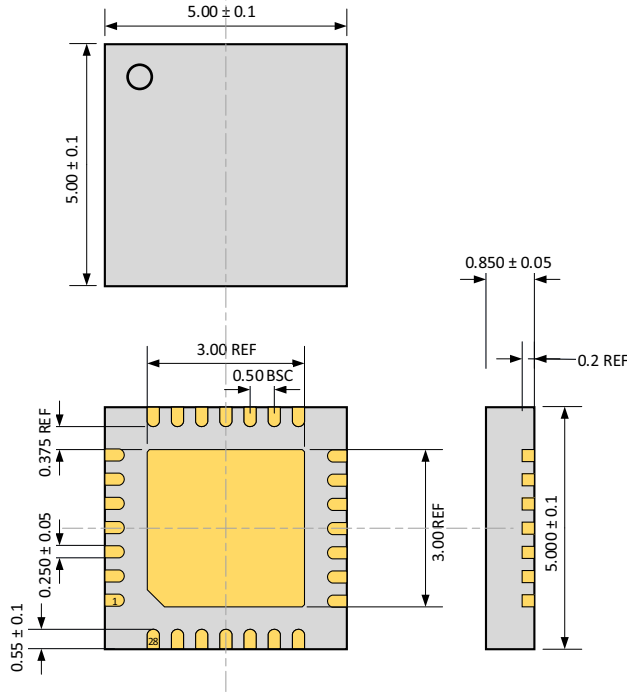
QFN 28-pin 5x5mm drawing (all dimension in mm)
